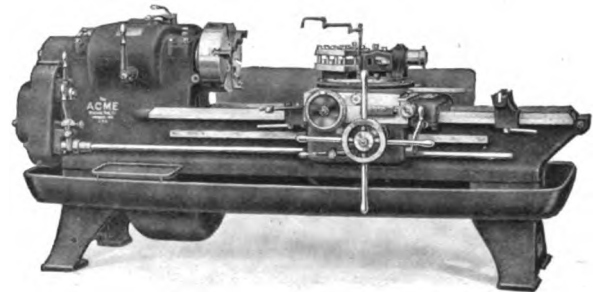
3¼x36 inches (82,55x914,4 mm.) Flat Turret Lathe With Chucking Equipment
